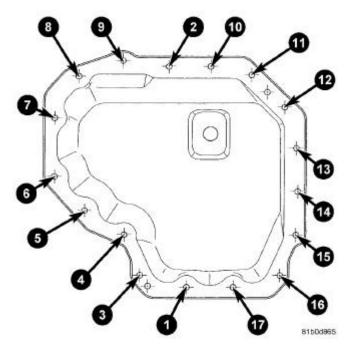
LOWER OIL PAN TORQUE SEQUENCE Courtesy of CHRYSLER LLC
